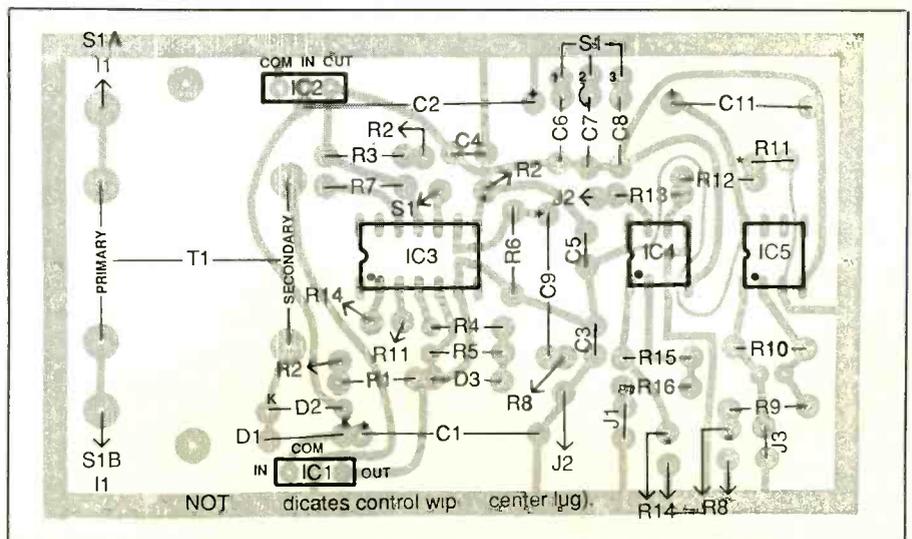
Wiring diagram for pc board and layout for perforated-board.
